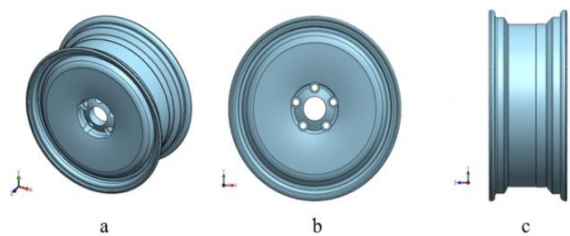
a) Trimetric, b) front and c) side views of the wheel
